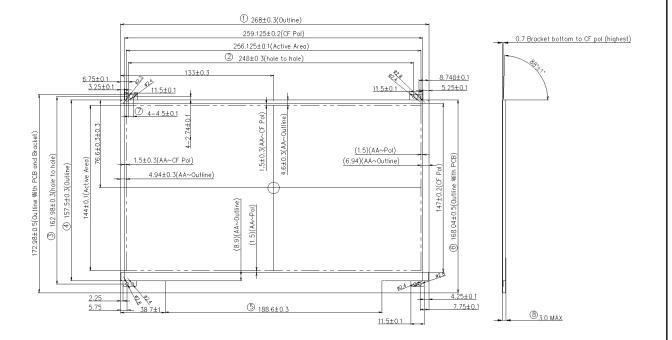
TFT-LCD Module Outline Dimension (Front View)
